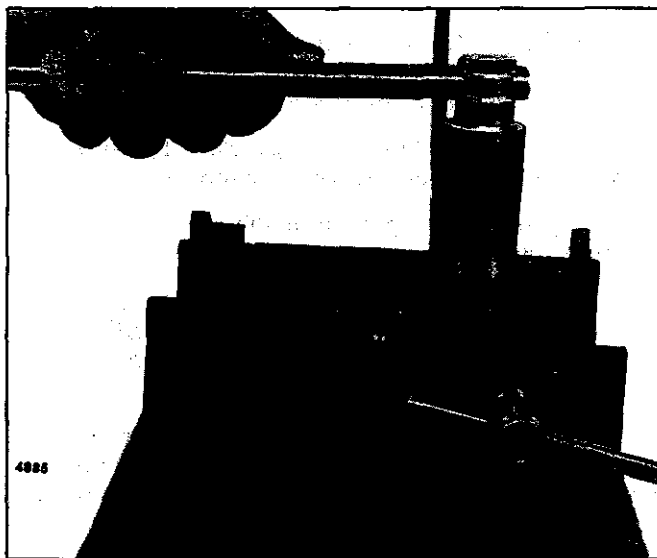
Removing Injector Nut Using Tool J 4983-01
